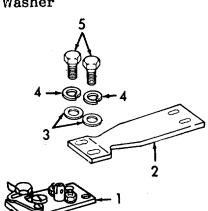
Clamp and Arm Assemblies, Assembly.
